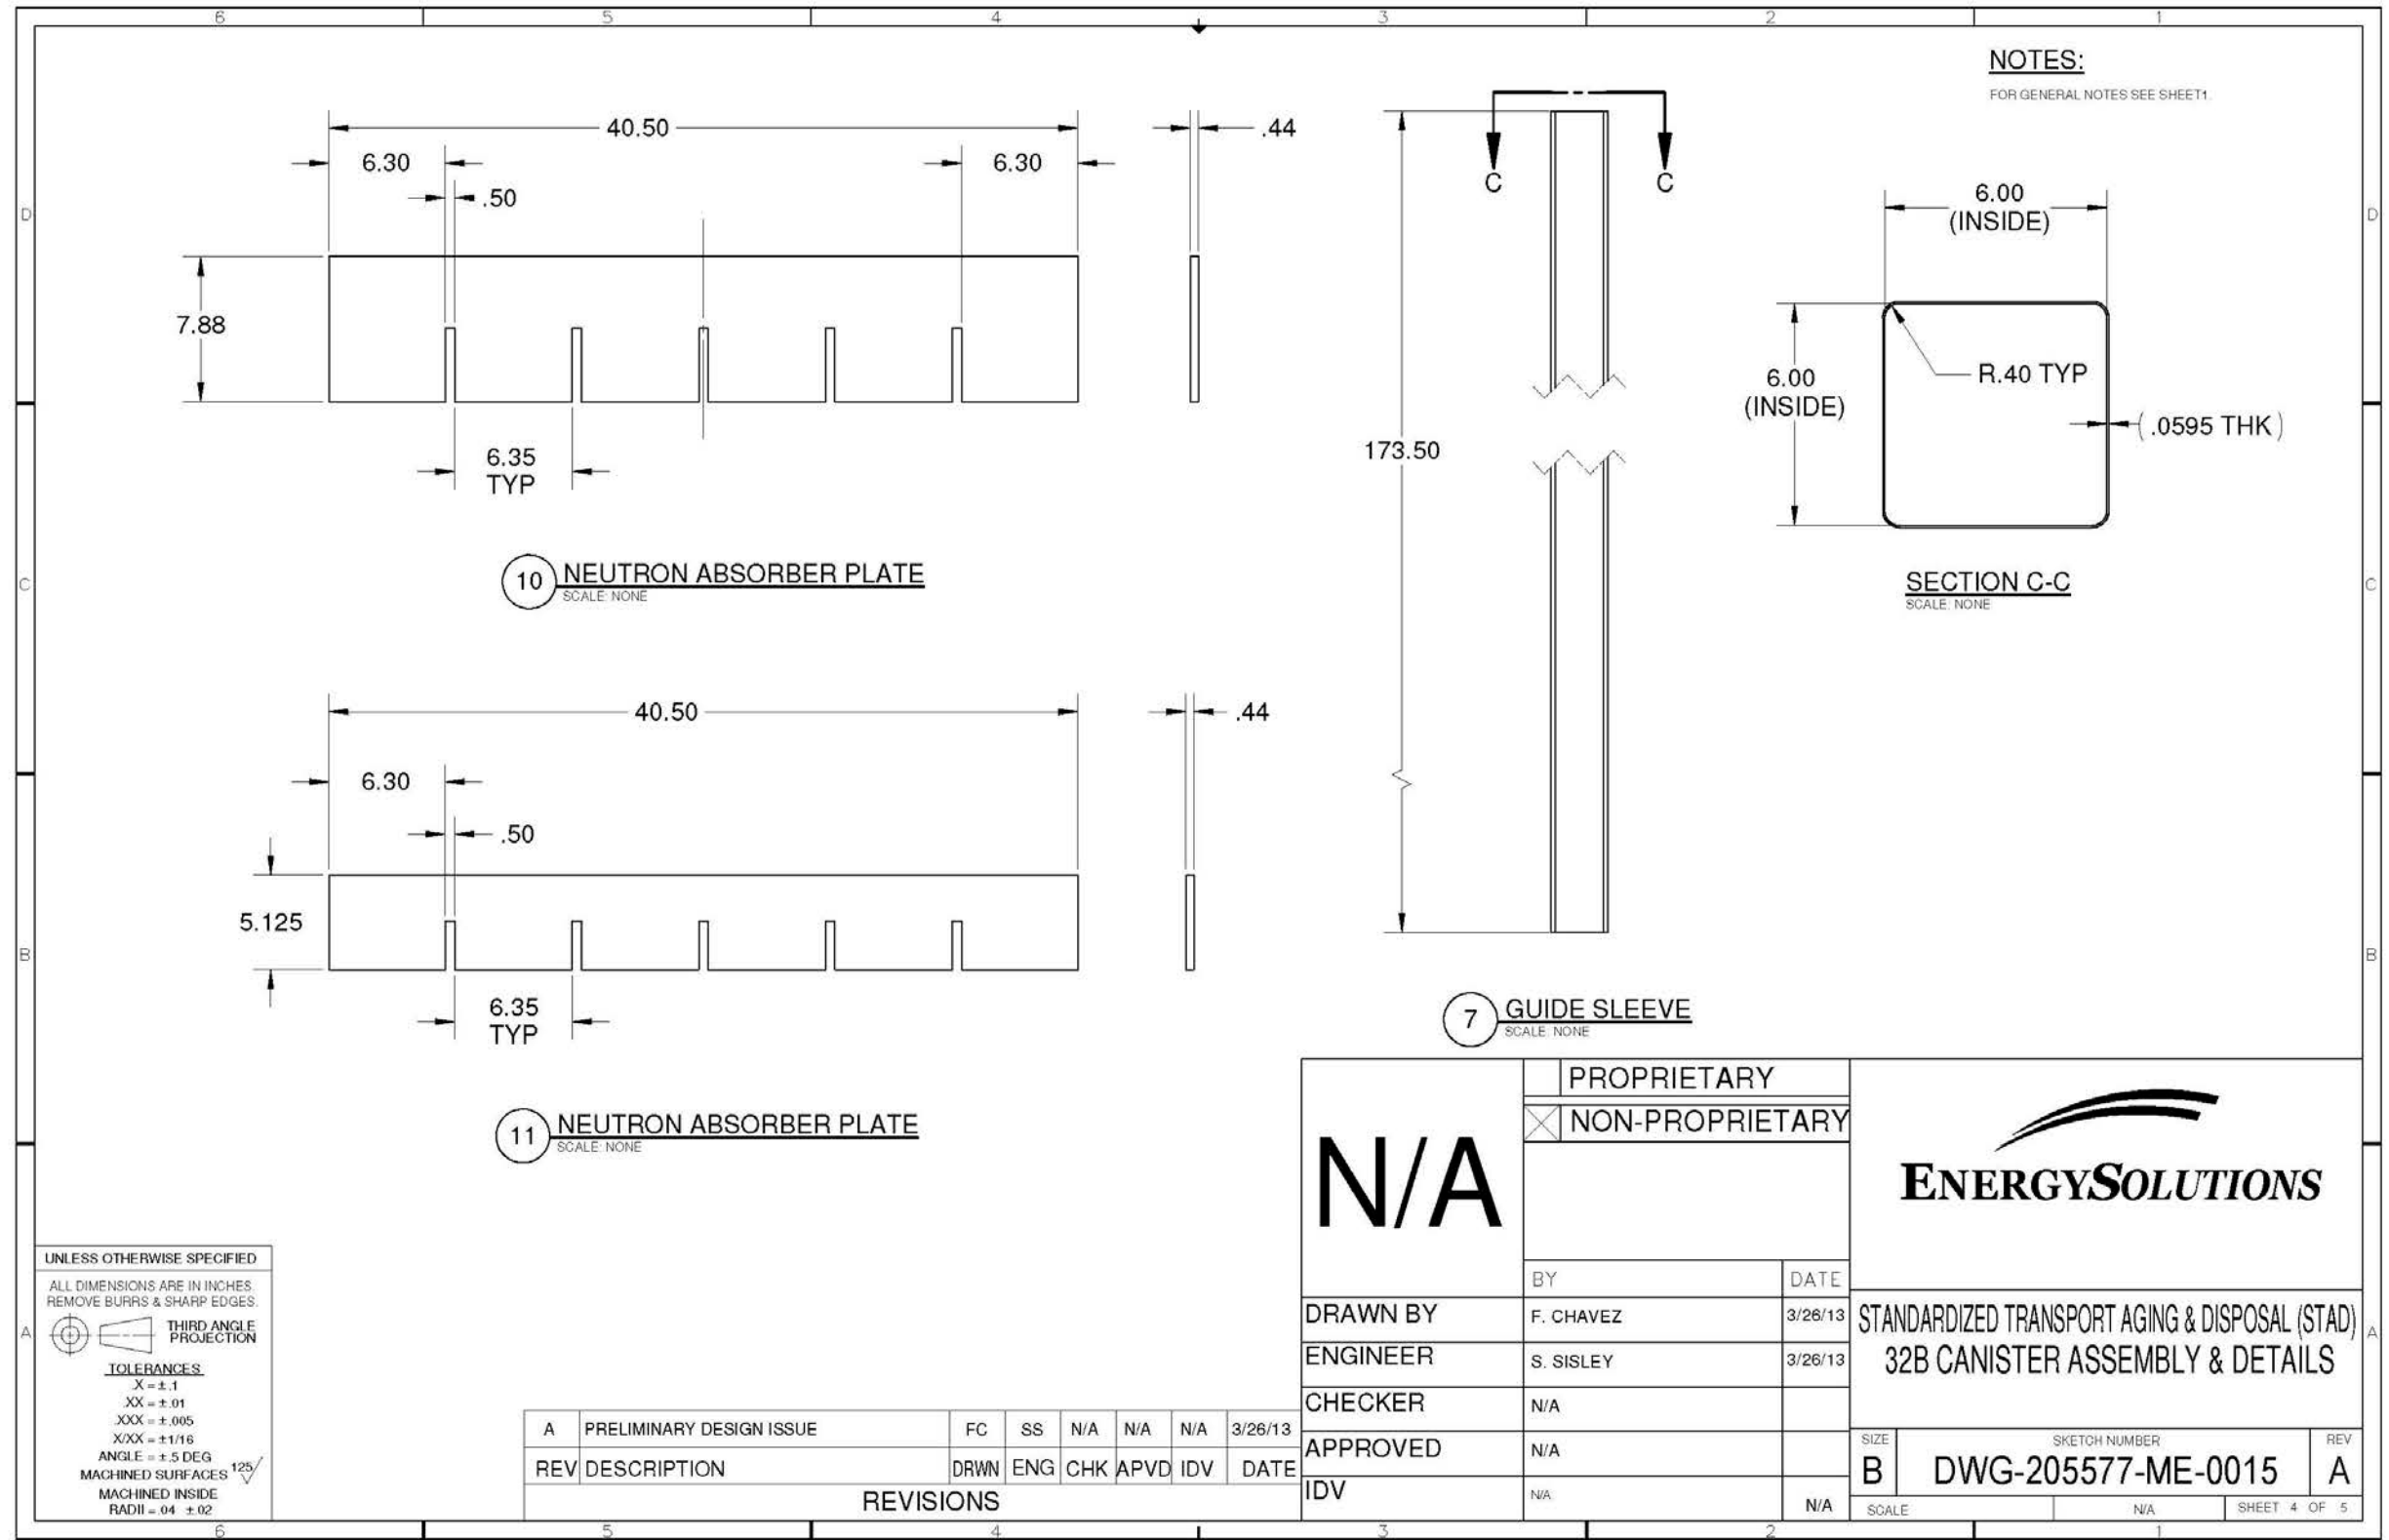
Standardized Transport, Aging and Disposal Canister - 32 BWR Assemblies - Assembly & Details – Sheet 5 of 5
